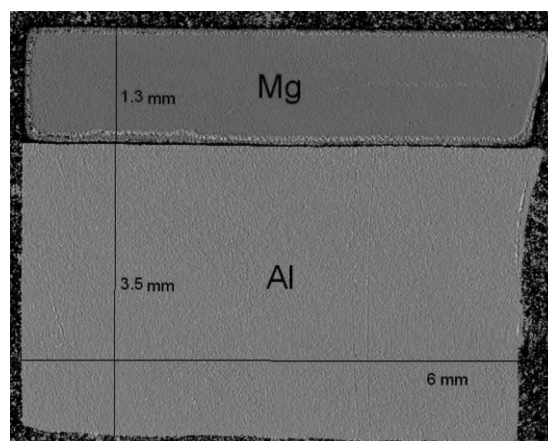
Image of Mg/Al explosive welded bimetal from 3D Optical Profiler
